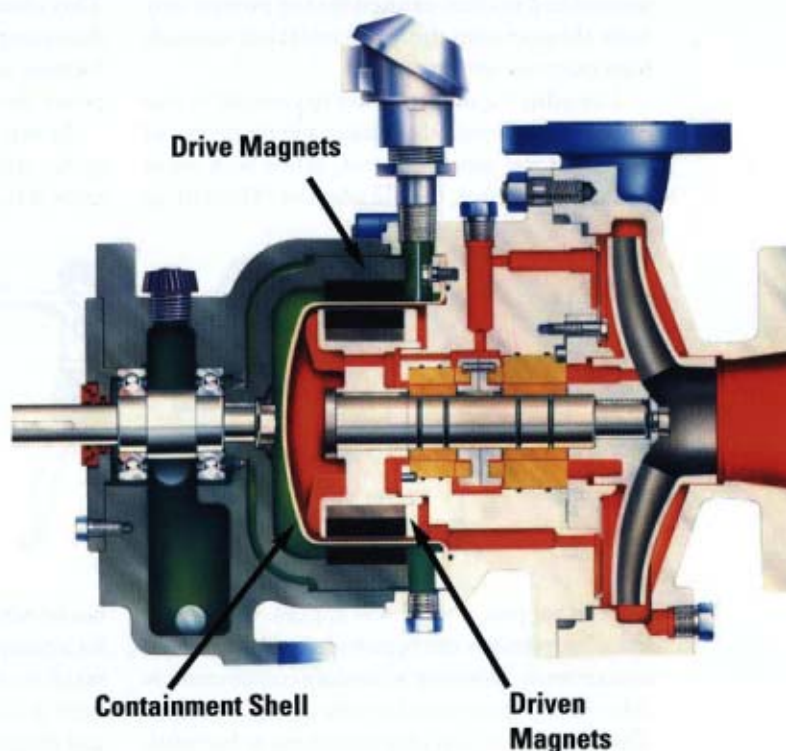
For magnetic drive pumps, power transfer is achieved with a magnetic coupling. As the name implies, the drive or output shaft of a driver is coupled to the pump's driven or input shaft by a series of magnets.
